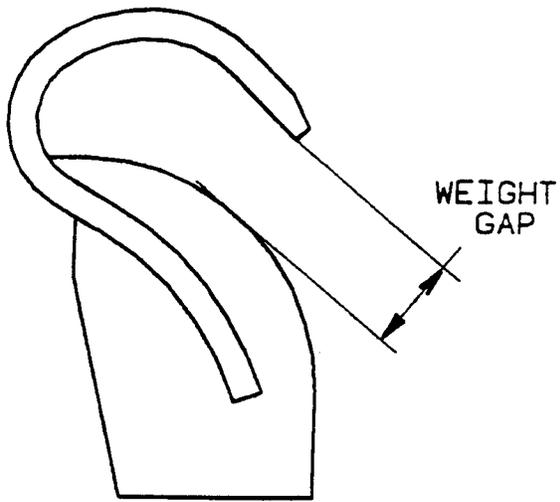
ALUMINUM WHEEL RIM FLANGE TERMINOLOGY
